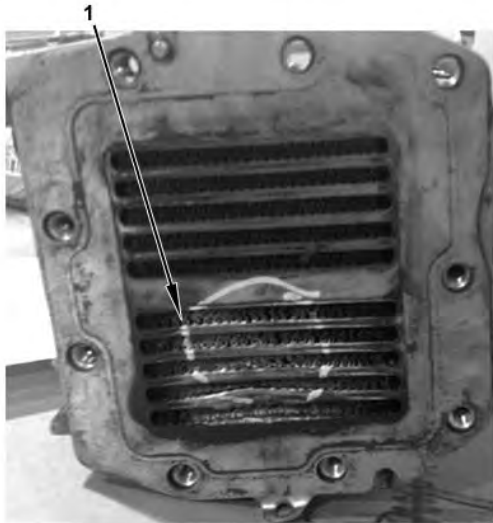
EGR Cooler Inlet Damage from EGR Valve Broken Shaft or Flap
